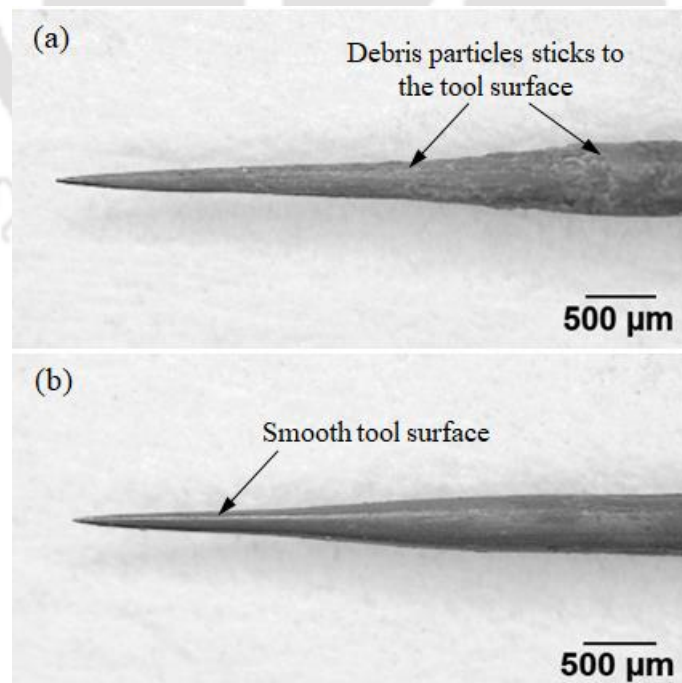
Fabricated microtool at 7V and 3 S/m for setup1 (a) without and (b) with tool rotation
